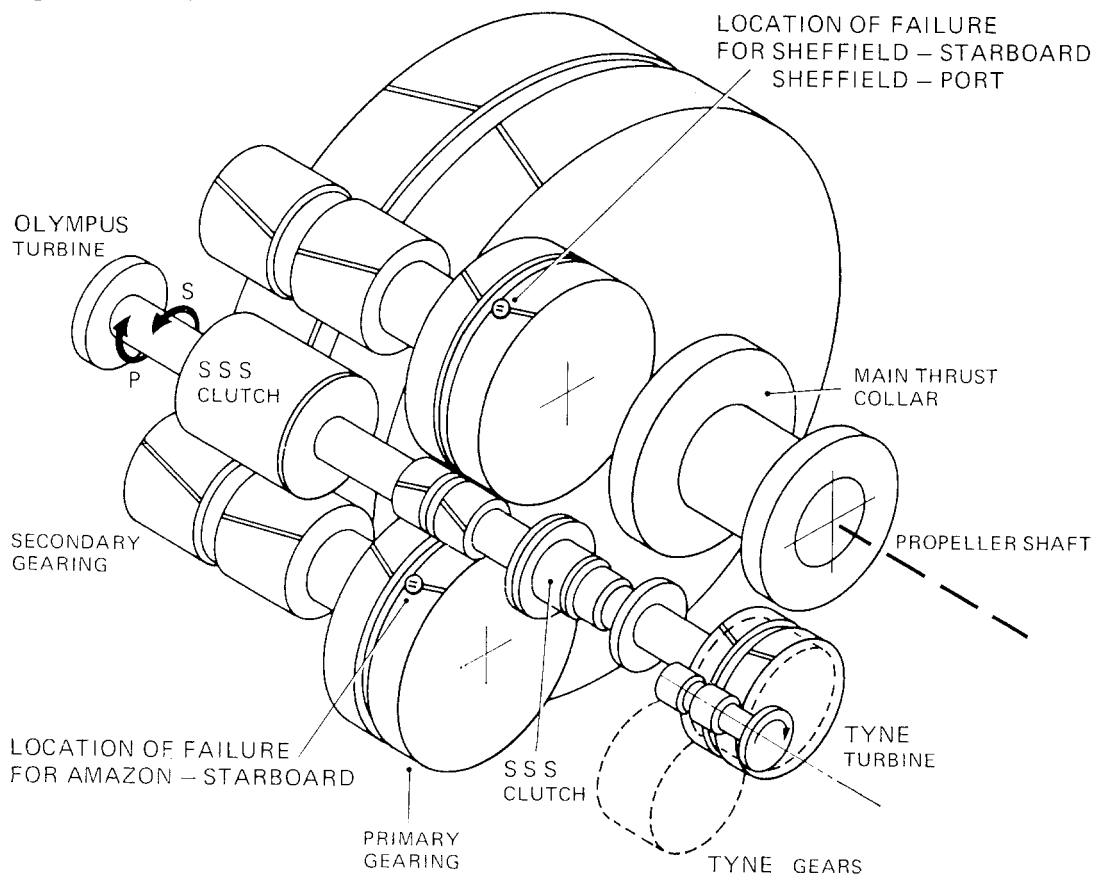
SCHEMATIC DIAGRAM OF TYPE 42 DESTROYER STARBOARD GEARING. PORT GEARING ARRANGED OPPOSITE HAND, WITH IDLER WHEEL FITTED IN TYNE GEARS SHOWN DOTTED
